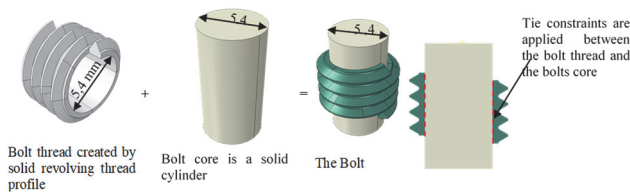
The bolt thread is tied to the bolt core to create the bolt
